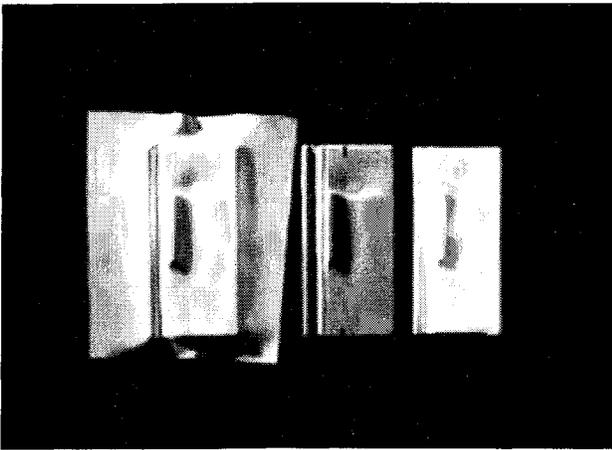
Example of milled panel formwork, vacuum formed panel, and cut final panel.
